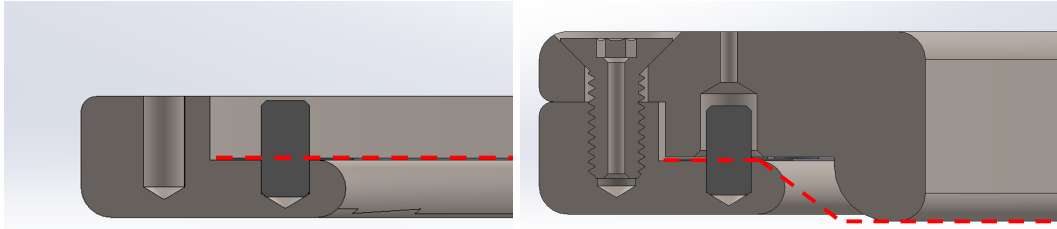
Visual of how the mesh will be assembled. Pegs fit securely into the base frame half and hold the mesh in place as the tensioning ring piece presses down and stretches the mesh. The mesh hole and the upper frame piece have oversized holes for the pins to go through for ease of assembly.
